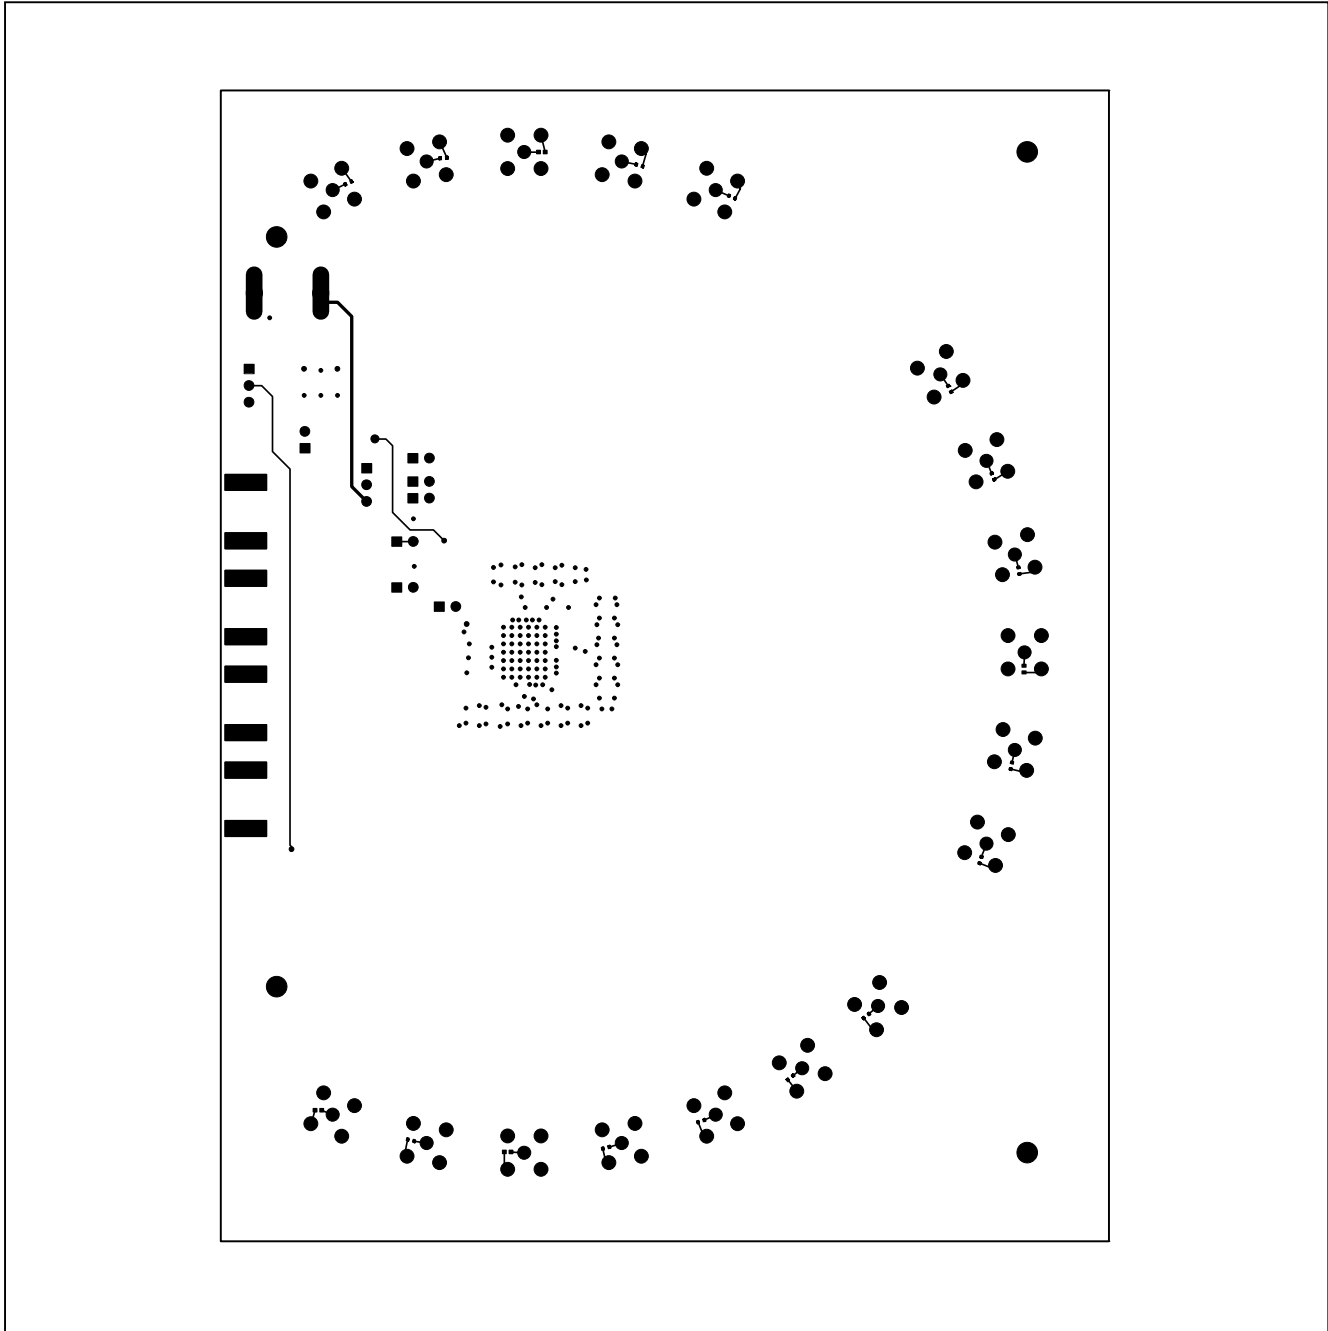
MAX3881 EV Kit PC Board Layout—Solder Side
